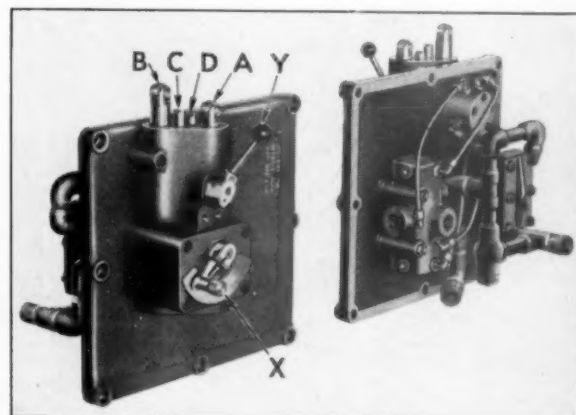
Panel assembly of complete machine tool feed control circuit.
